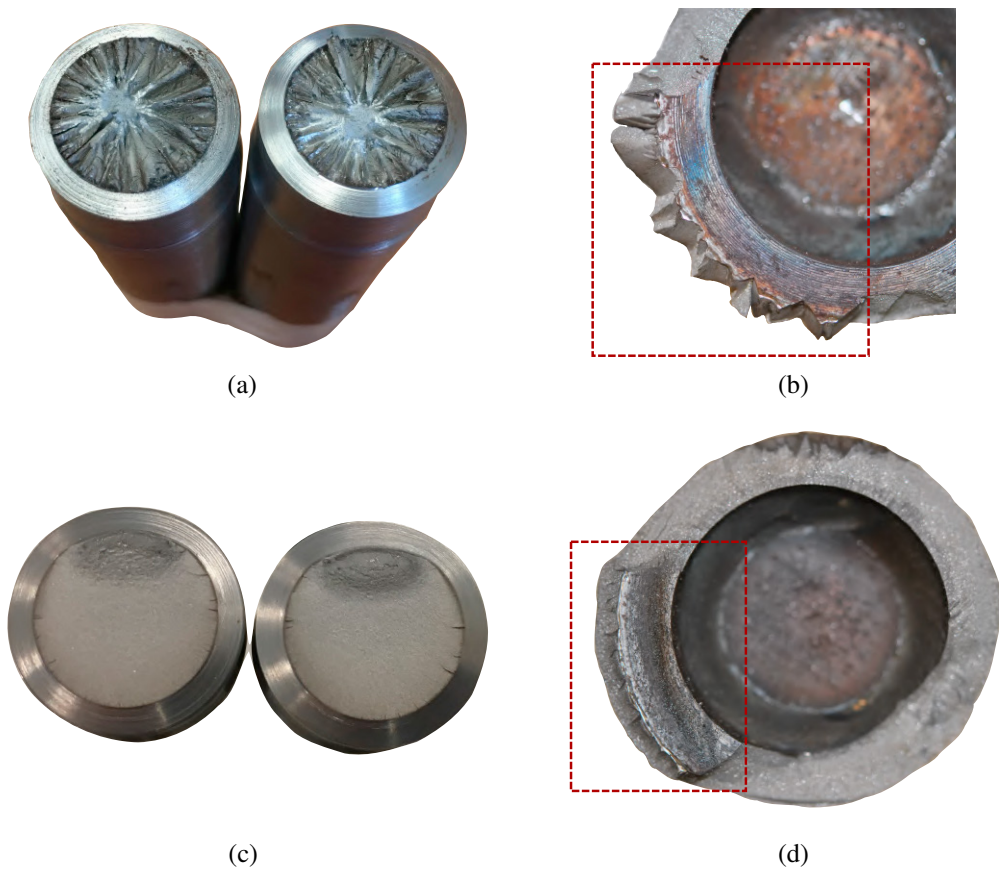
Fracture surface for a torsion loaded notch specimen (a), fracture surface for a torsion loaded welded joint (b), fracture surface for a tensile/compressive loaded notch specimen (c), fracture surface for a bending loaded welded joint (d)
